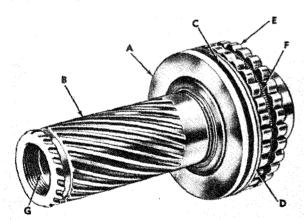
DISASSEMBLING EXTERNAL PARTS OF DRIVE CLUTCH ASSEMBLY.
